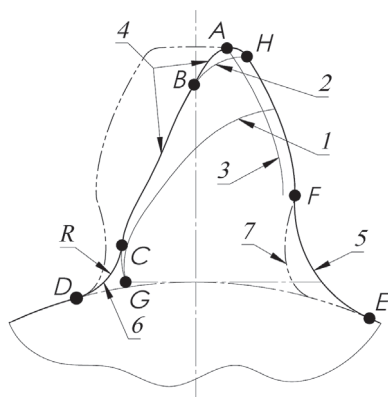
Shape of the tooth after geometric modification; solid line – modified tooth shape, dashed line – base tooth shape
